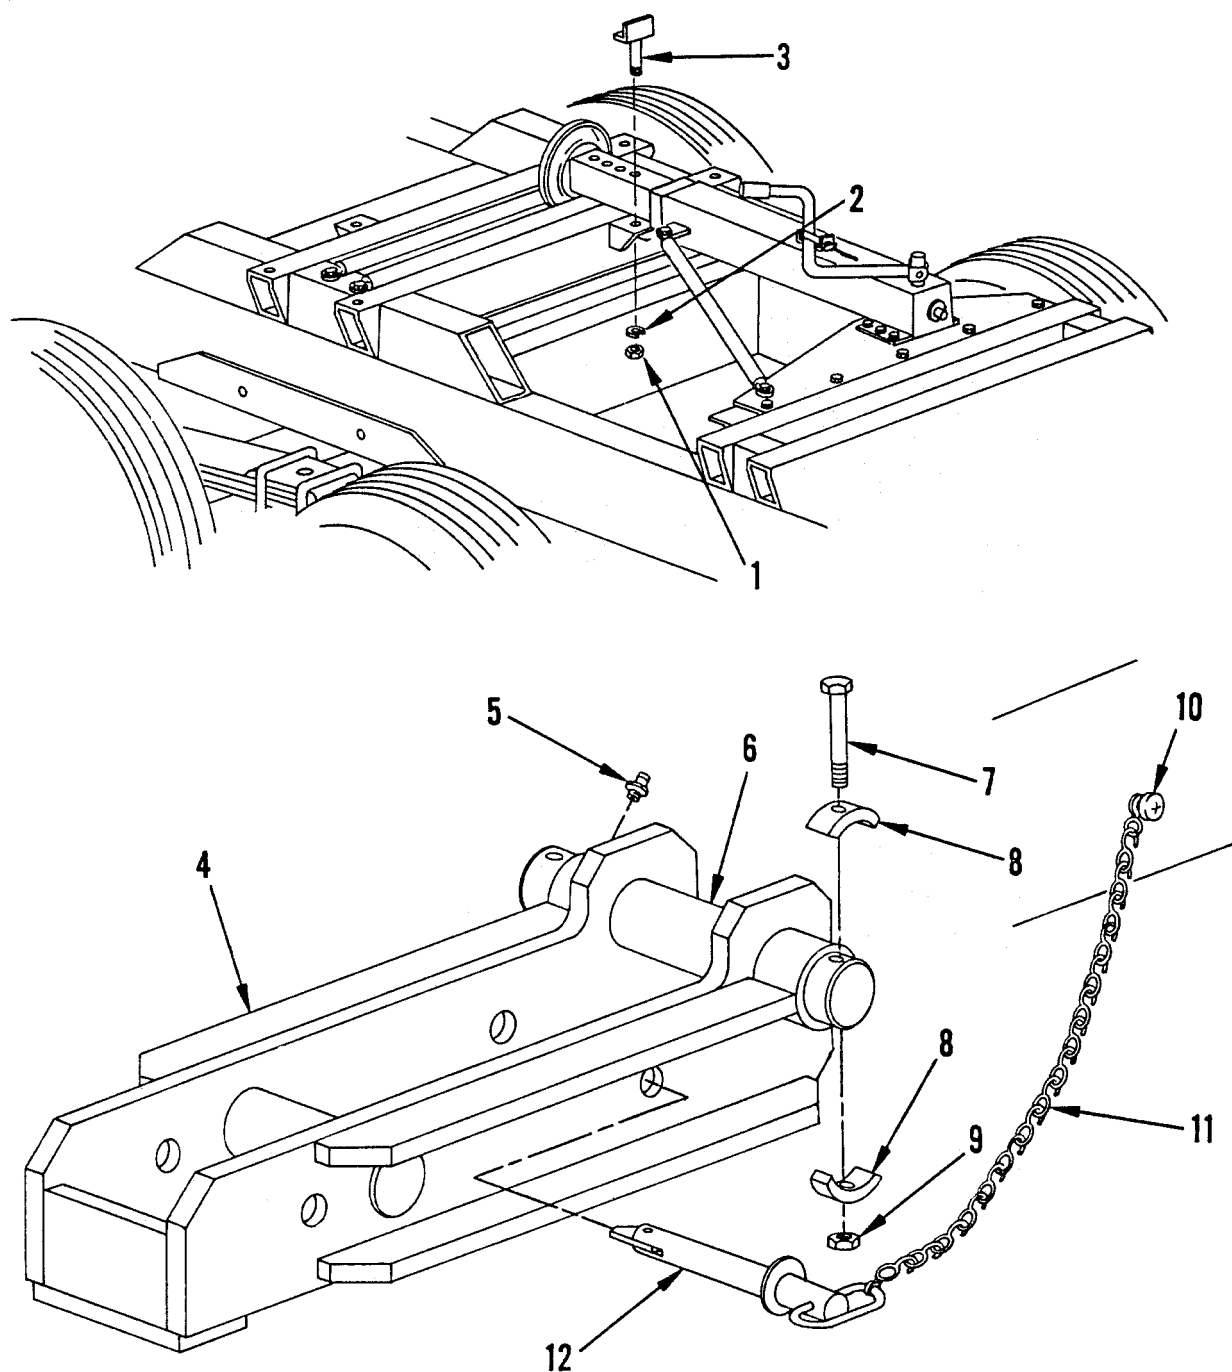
Landing Gear Stowage and Lifting Arm Assembly
